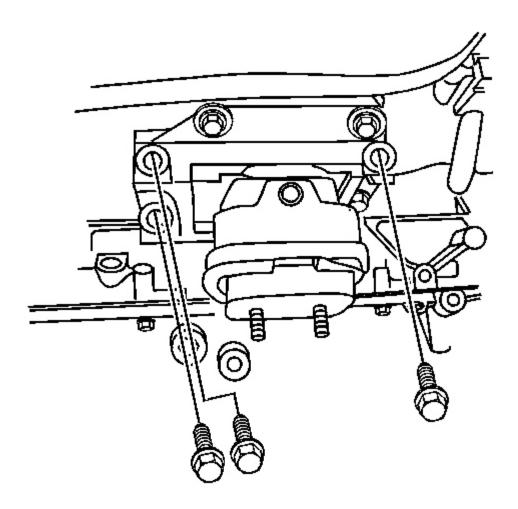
Identifying Upper Engine Mount Assembly Courtesy of GENERAL MOTORS CORP.
